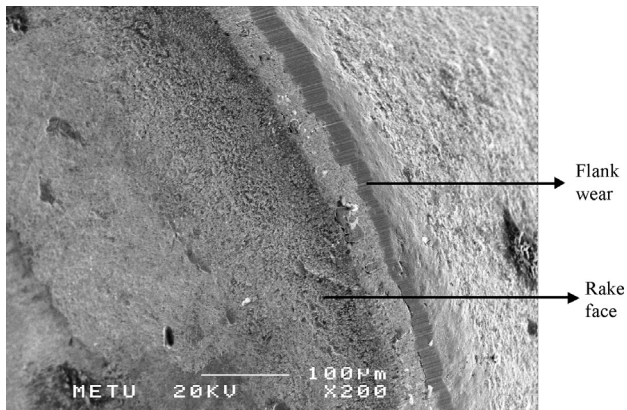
Typical SEM view of the flank wear on Tool A after machining of the normalized specimen at the cutting speed of 160 m/min.
